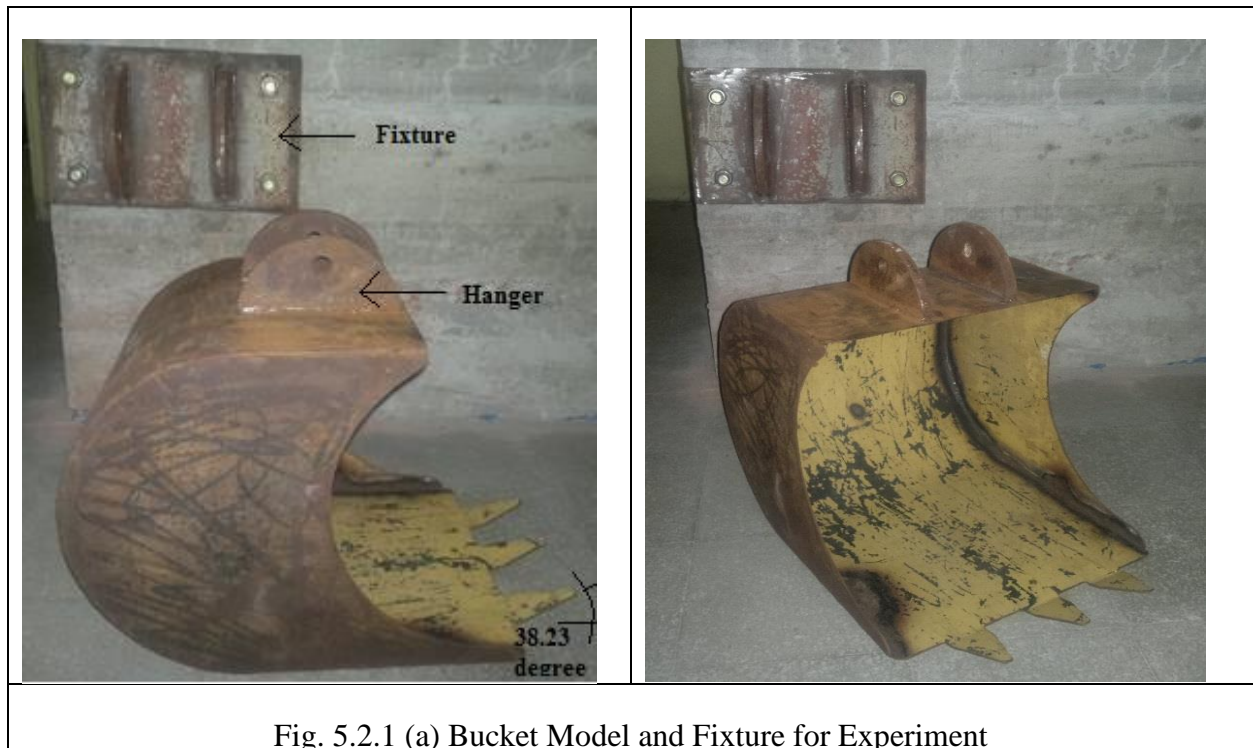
(a) Bucket Model and Fixture for Experiment
